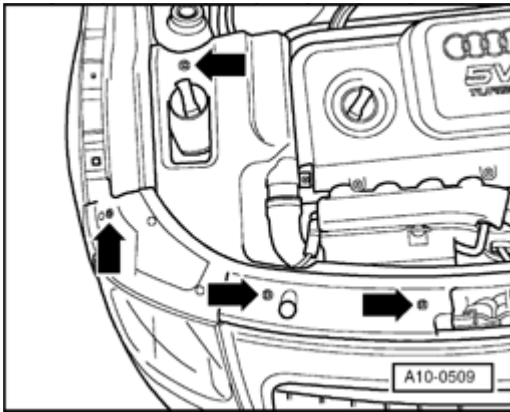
Removing Covers At Lock Carrier And Above Coolant Expansion Tank
